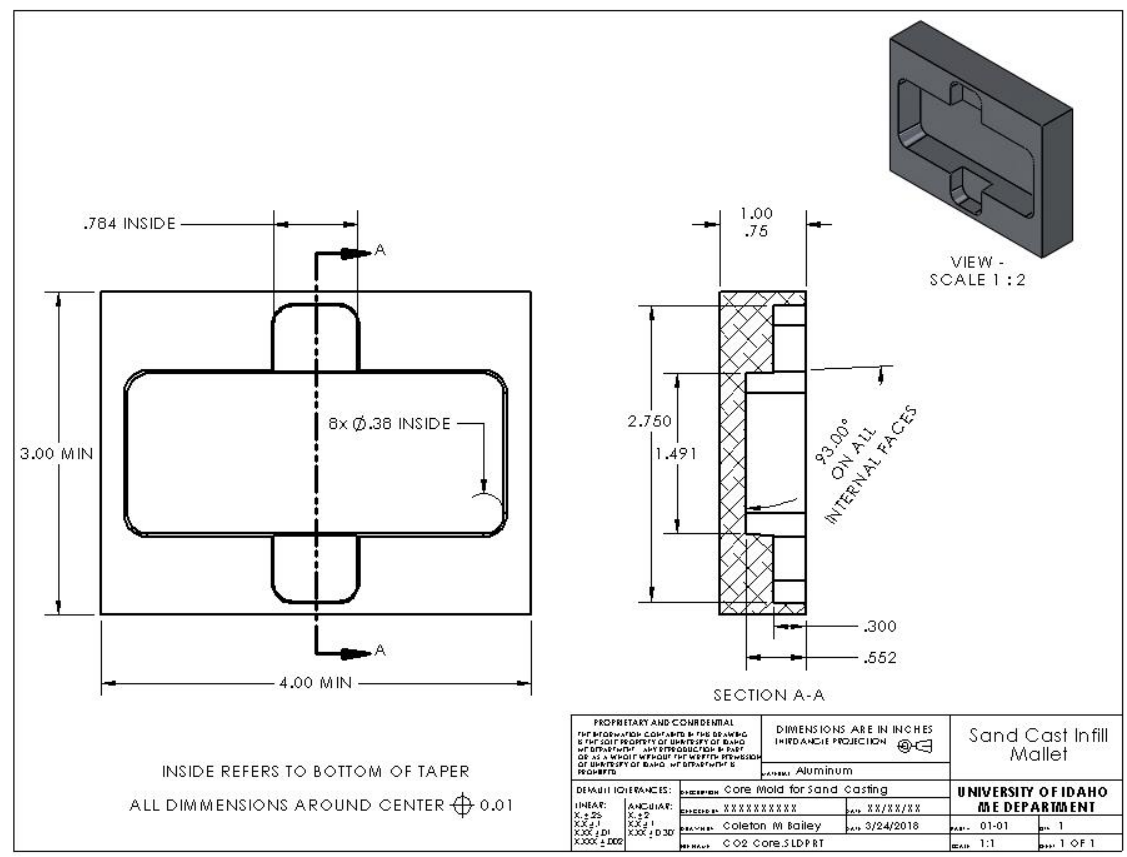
Drawing of the mold used to make the core for the sand casting manufacturing method.
